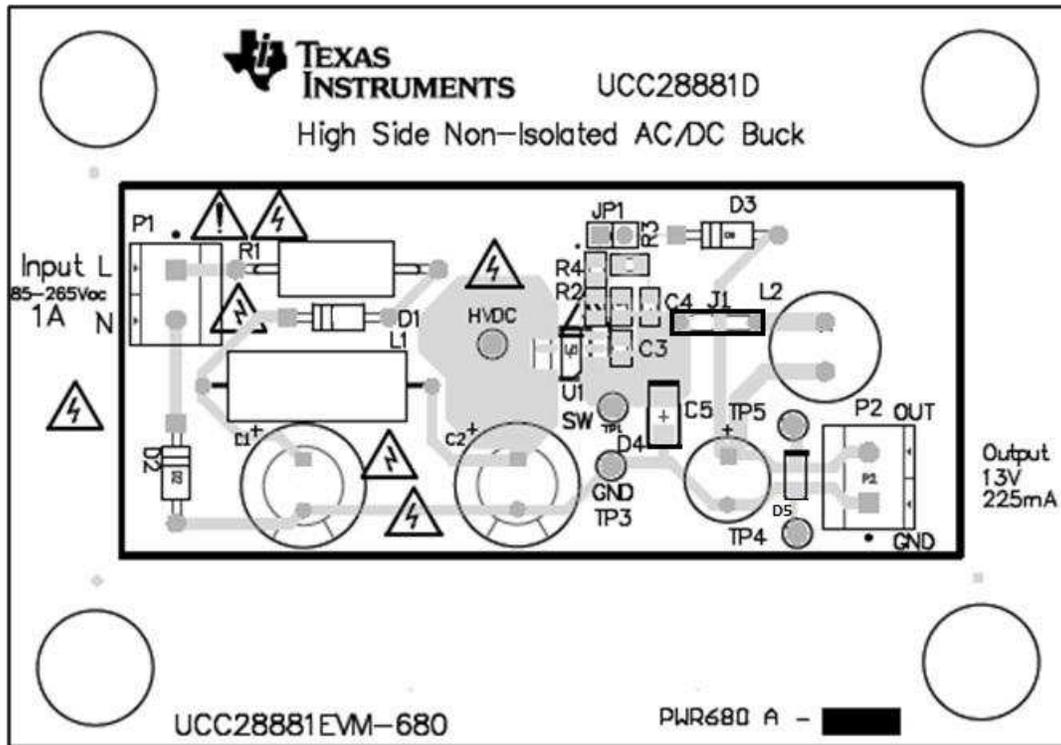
UCC28881EVM-680 Assembly Drawing/Layout
